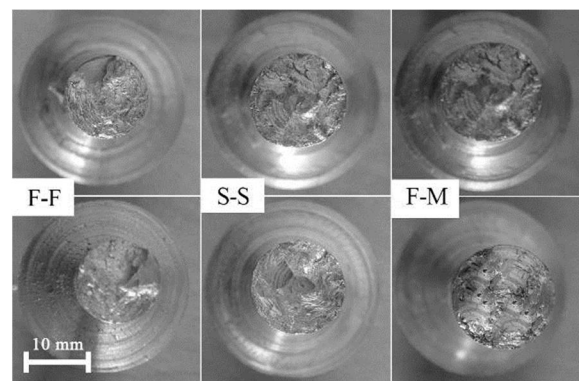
The cross section of broken welded part in 2500 rpm.
